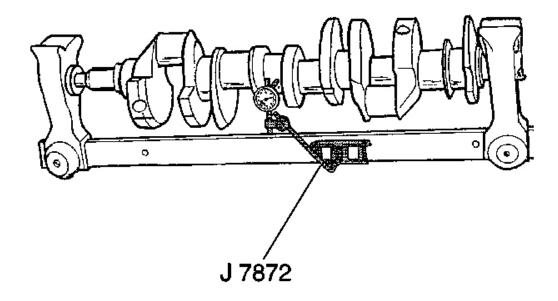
Measuring Crankshaft Runout Courtesy of GENERAL MOTORS CORP.
